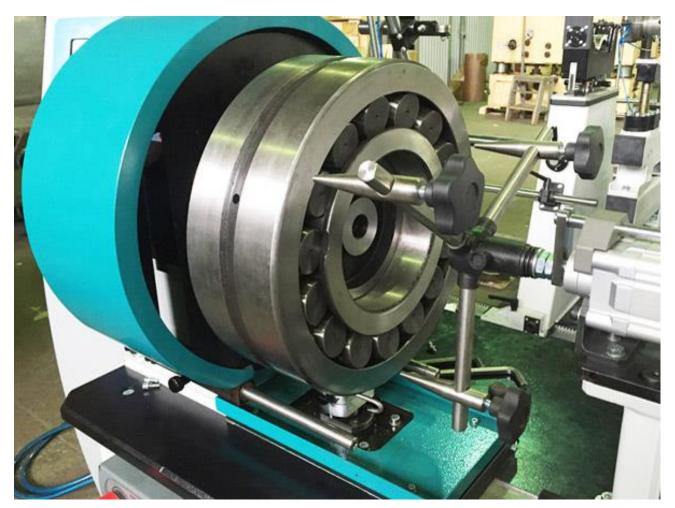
Stand of incoming inspection of bearings CII-180M
